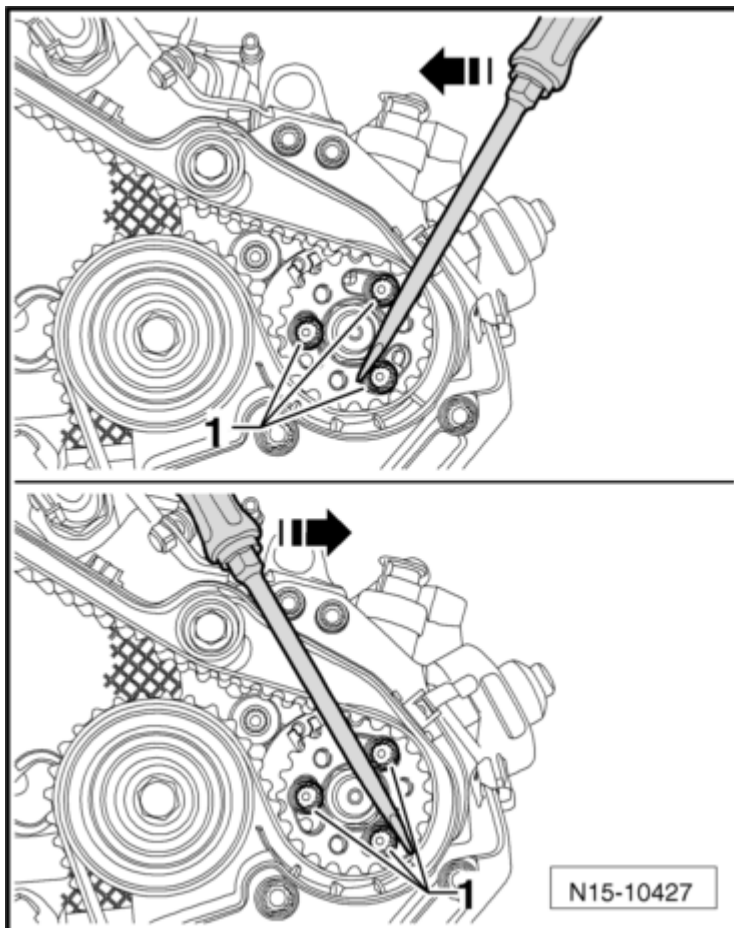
Identifying Screwdriver Secured At Bolt Heads -1-
